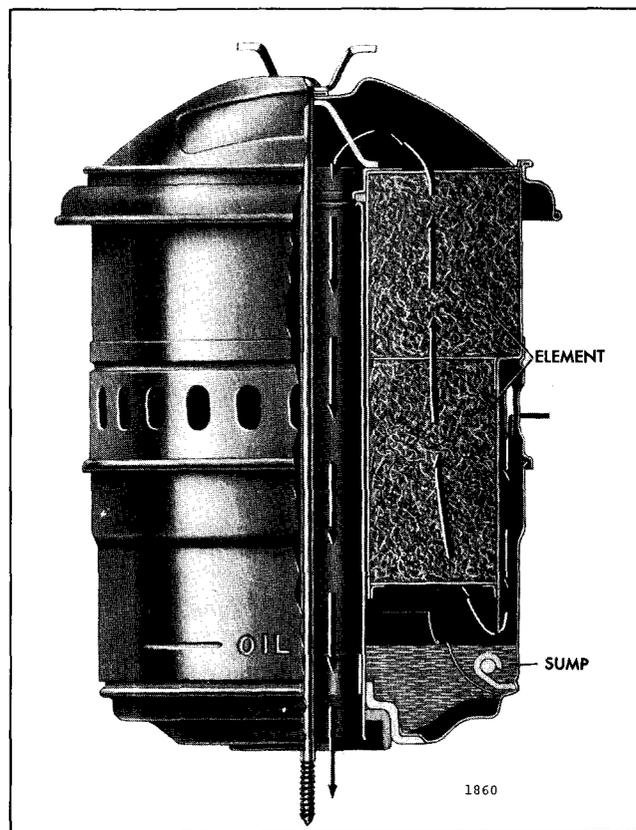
Light Duty Oil Bath Air Cleaner Assembly
